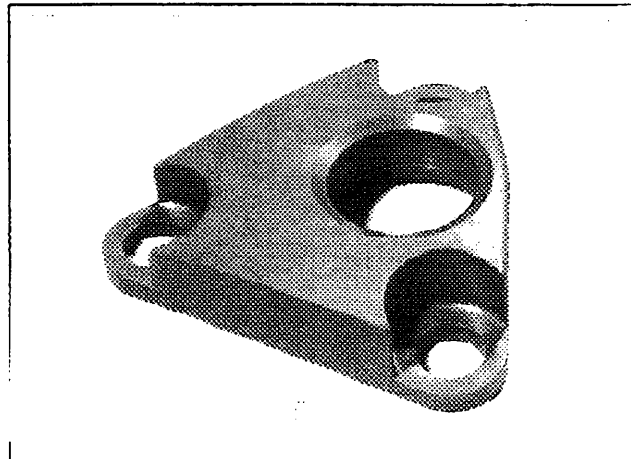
FRONT REINFORCED TOP MOUNTING PLATES
